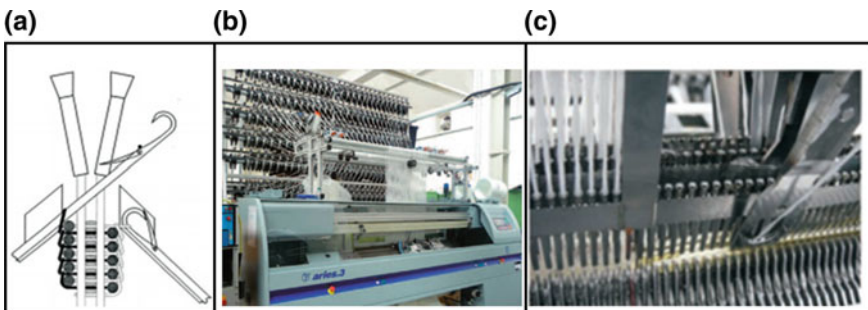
a Schematic views of 3D weft knitting methods. b 3D knitting machine. c Weft yarn carrier during knitting [100, 103]
